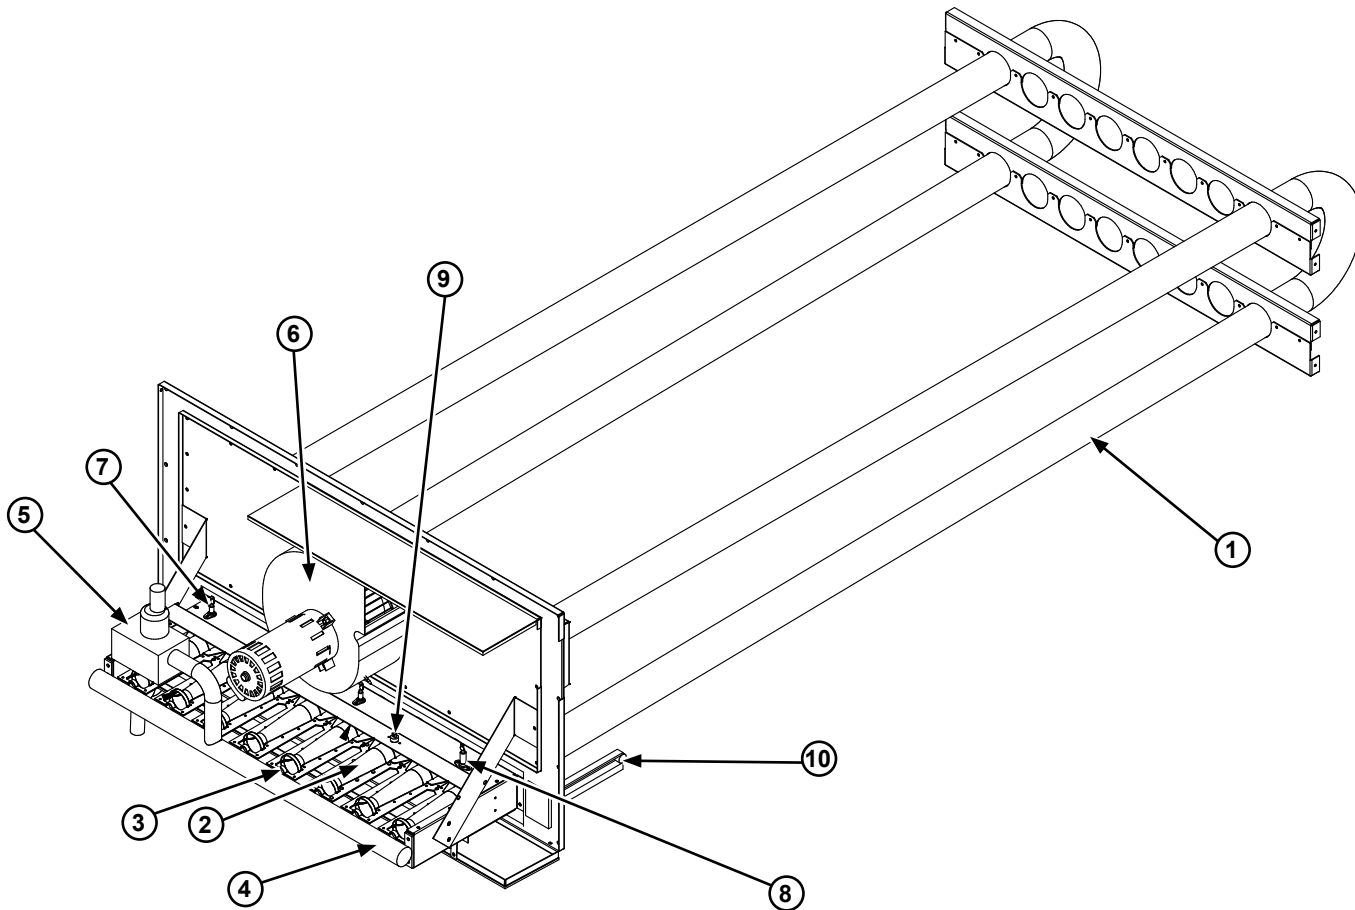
STAGED HEAT EXCHANGER ASSEMBLY
